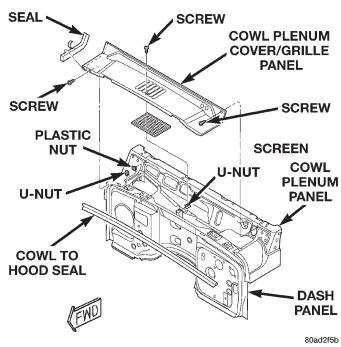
Cowl Plenum Cover/Grille Panel Remove/
